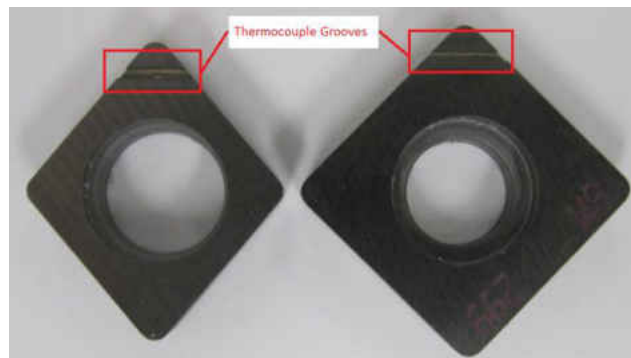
(Left) Machined OD tool shim (Right) Machined ID tool shim
